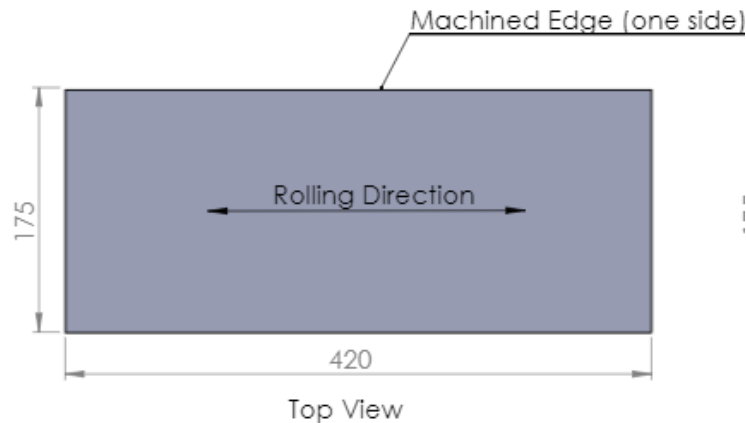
Friction stir weld plate (dimensions in mm)
